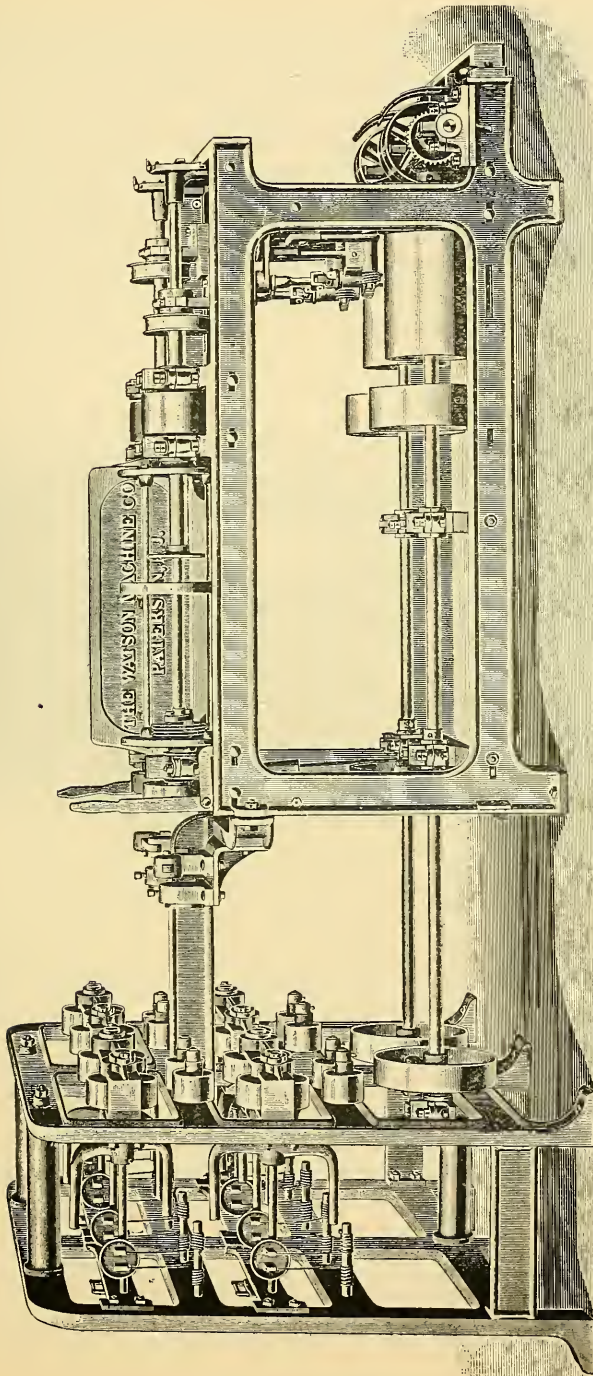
A 2-spindle machine to lay 2-, 3- or 4-ply cord. (Made by the Watson Machine Co., Paterson, New Jersey.)
